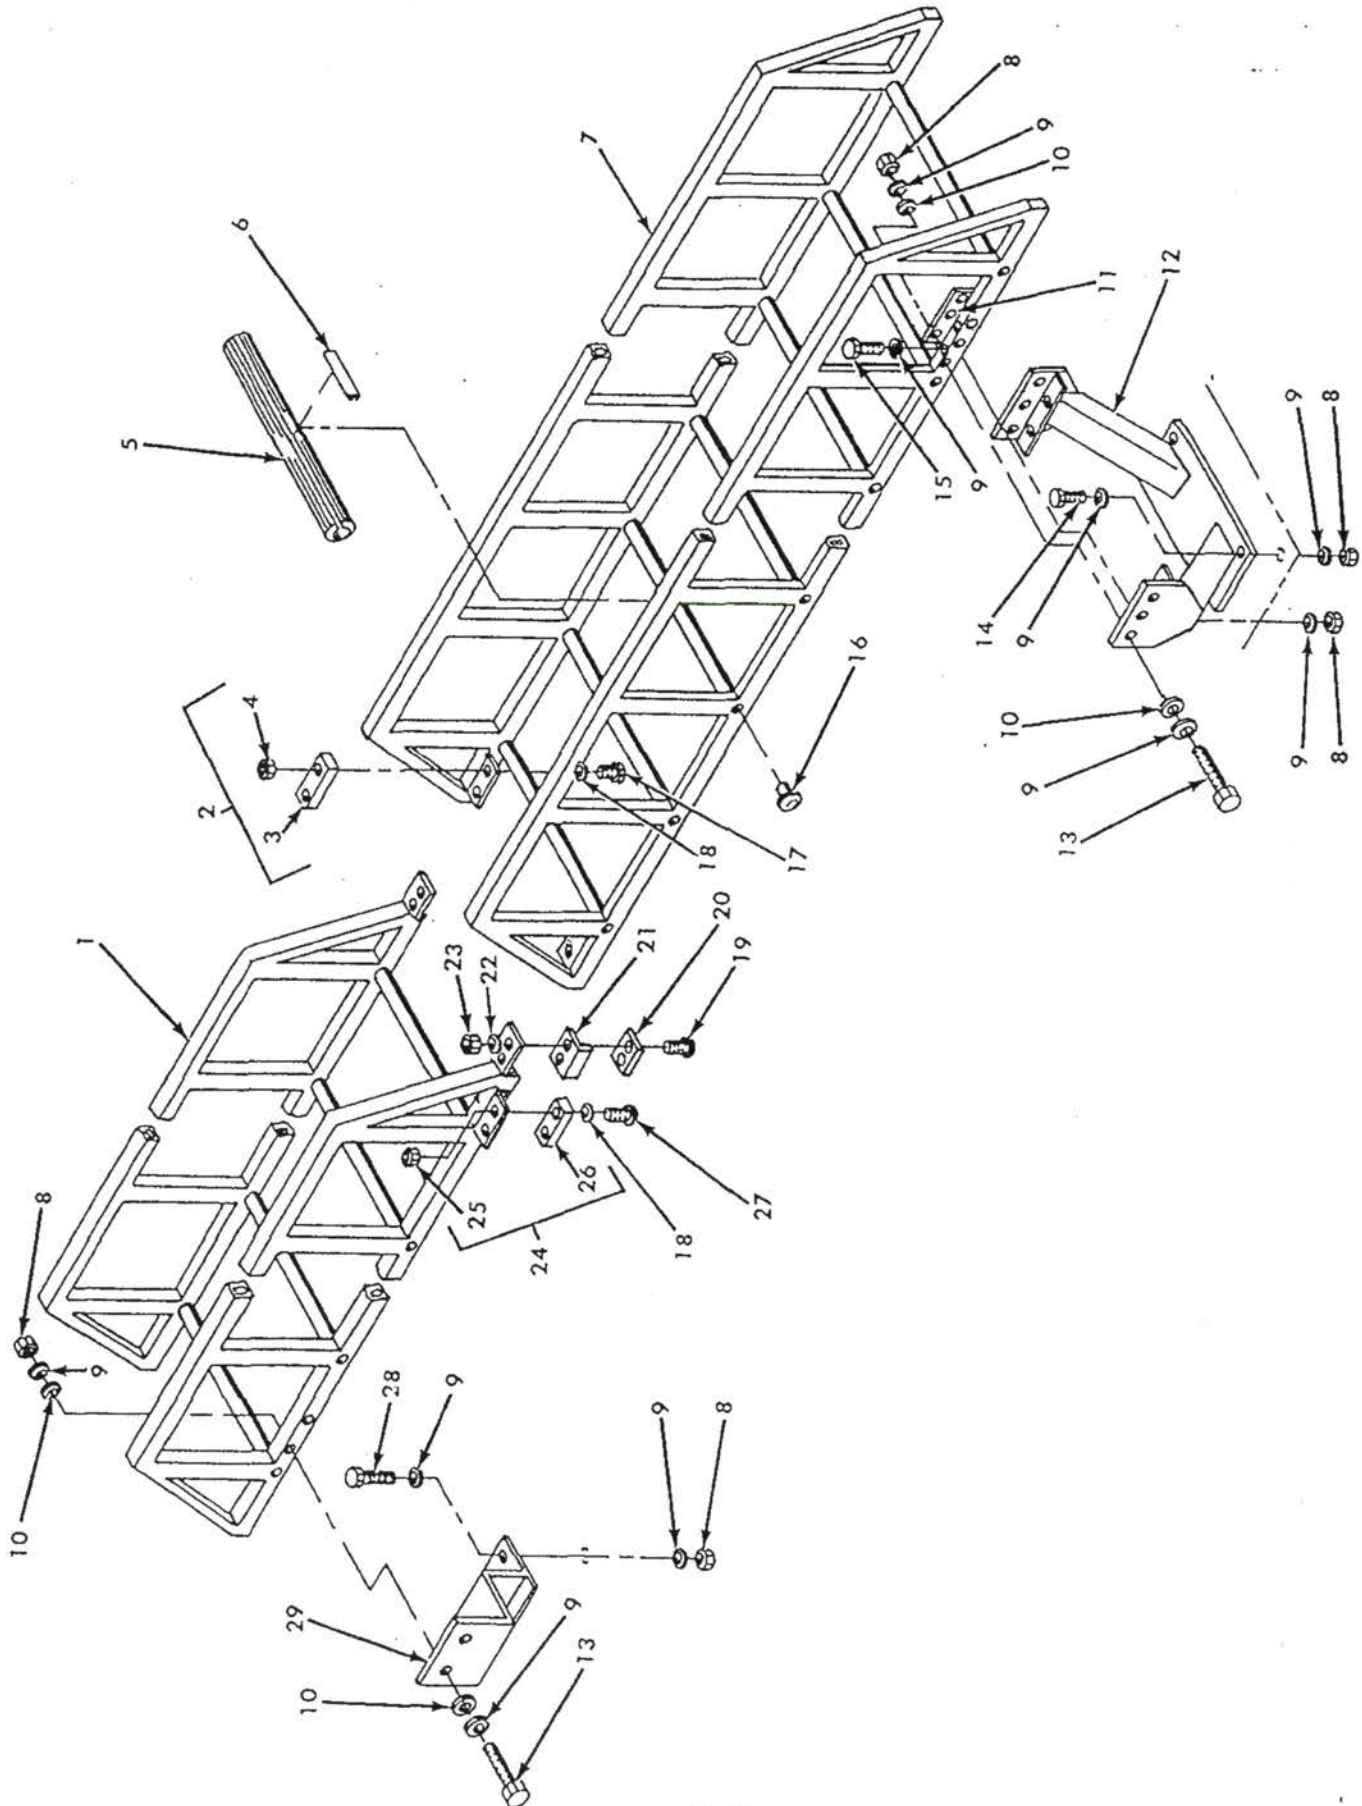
STEEL LADDER ASSEMBLY MOUNTING (CONFIGURATION 2)
